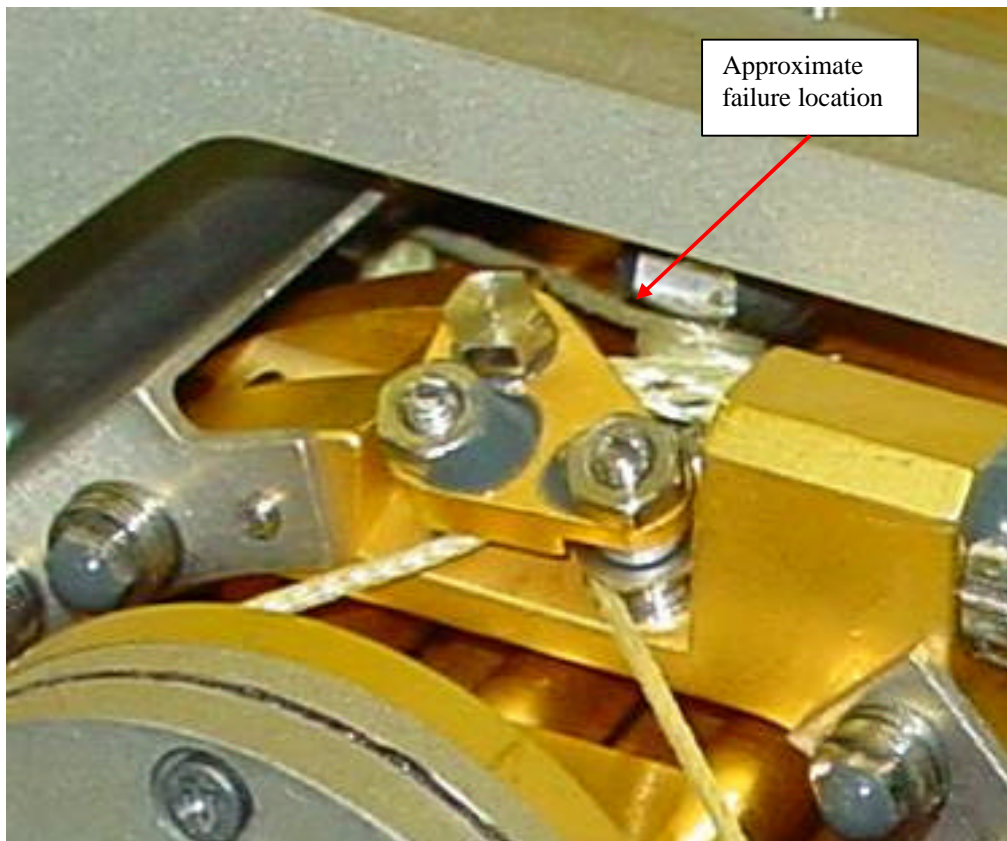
View of failure location after installation into CQM instrument, Sept. 2003.
